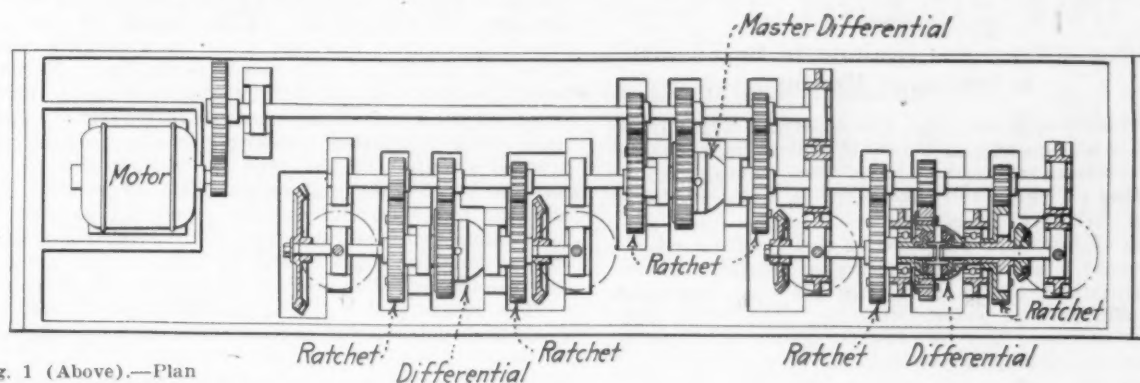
(Above).—Plan of the Gearing in the Four-Block Continuous Wire-Drawing Machine. The motor, through appropriate reduction gears, drives the master differential at the center. This drives in turn the two group differentials, each in the center of its own group of block drives. Ratchet wheels are used to permit stringing up the machine and getting it into initial operation
